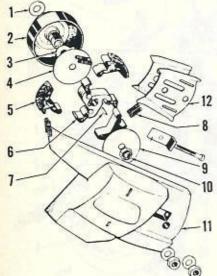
Exploded view of early clutch assembly used on model 275. Note drive key (7) and six clutch springs (8).
